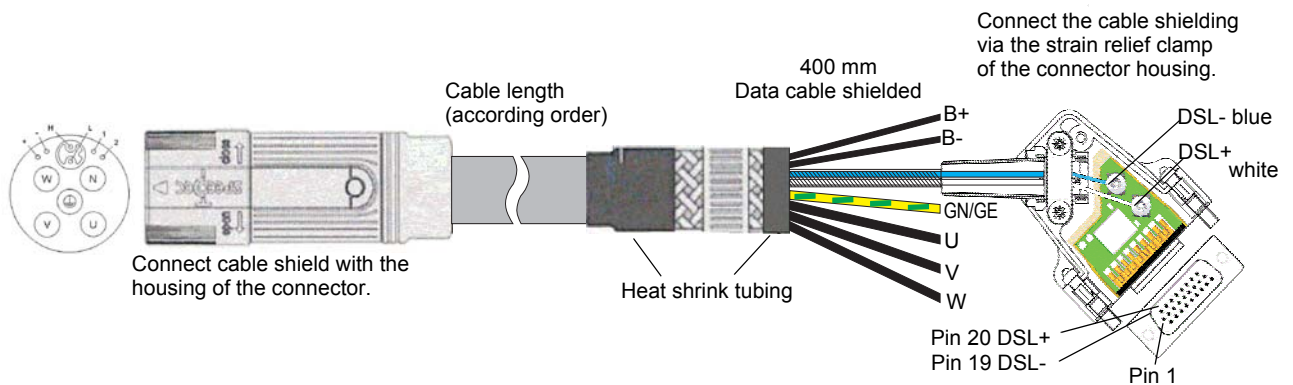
Motor cable with HIPERFACE DSL[®] 28 A
